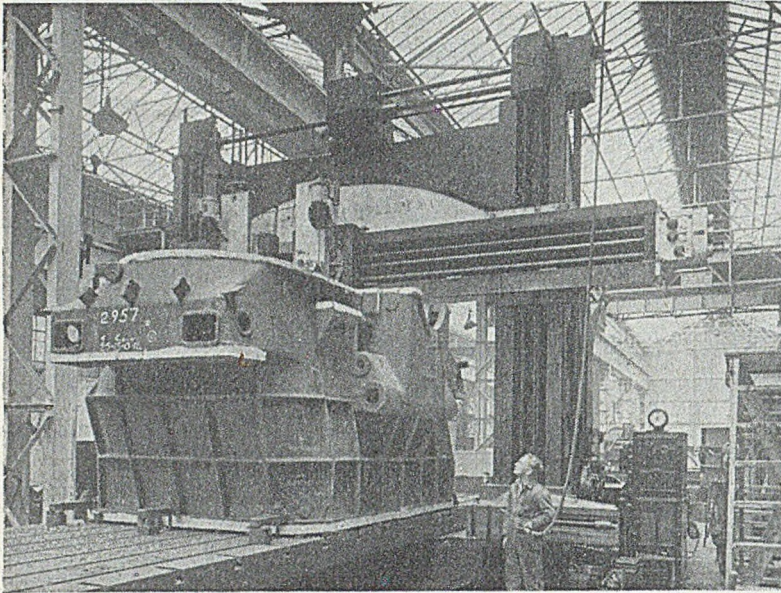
Exhaust Section Casting, weighing 25 tons 15 cwt., on the Planing Machine. For Casting this Job was Inverted.
